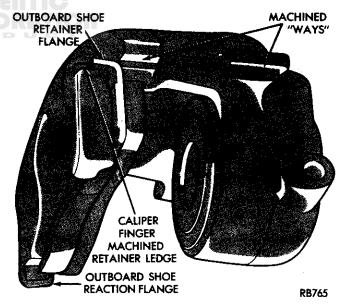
Outboard Brakeshoe Positioned On Caliper Finger
